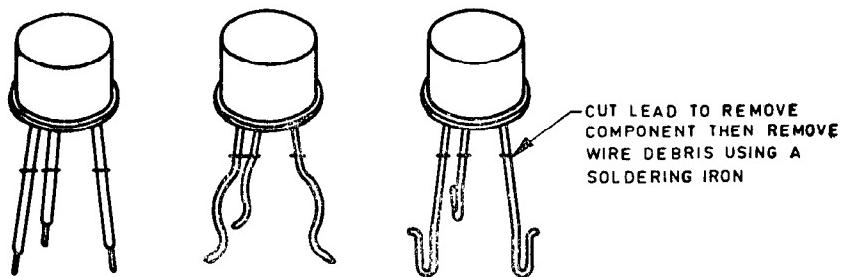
COMPONENTS WITH MULTI-LEAD OUT WIRES OF THE OD18 AND OD19 TYPE TRANSISTORS
